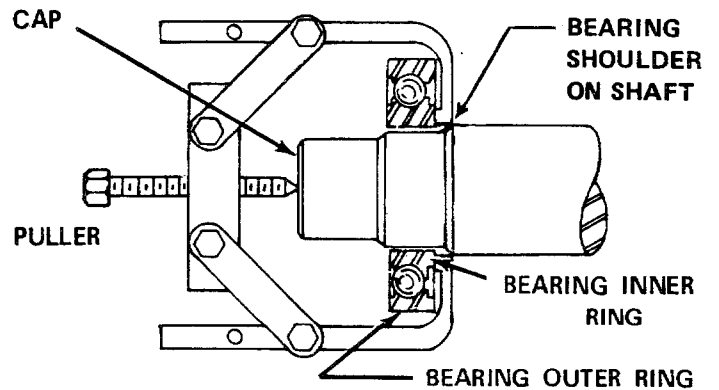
REMOVING BEARING FROM GENERATOR SHAFT.
